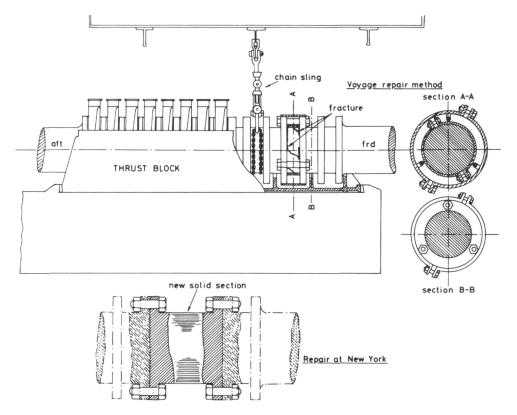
"Umbria"'s fractured shaft and repair method.
